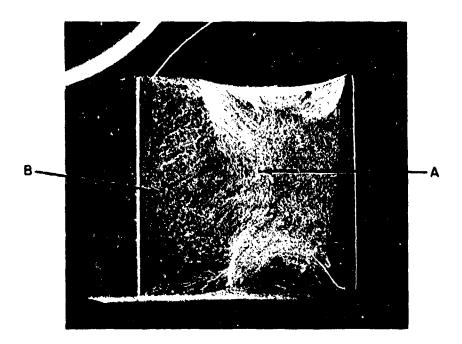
Fatigue fracture surface of an A-514 weld specimen, lix.
